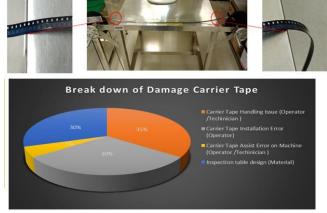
Inspection table design has big impact on carrier tape in terms of damage carrier tape
